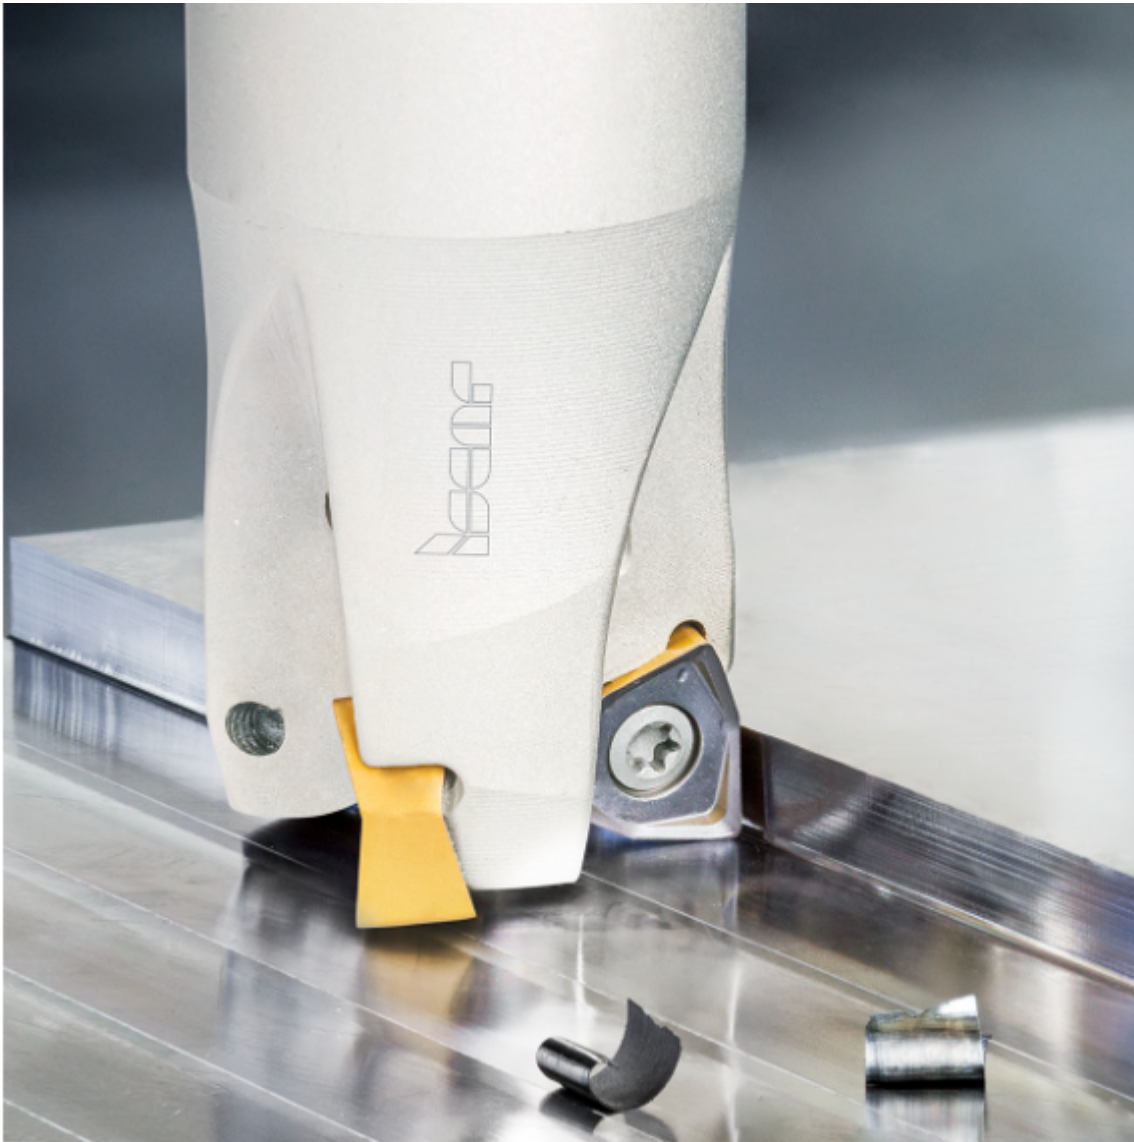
A double positive cutting geometry characterizes HELIDO Trigon milling cutters that carry double-sided inserts of a "broken-triangle" profile.
